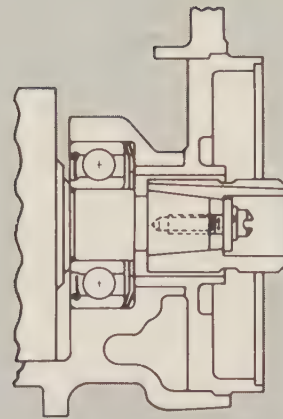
Shown here is an aircraft magneto application of the integral seal bearing. This bearing is grease lubricated and has a single seal of the clearance, or non-contacting type. The features shown are typical and can be applied to many designs using either single or double seals.
